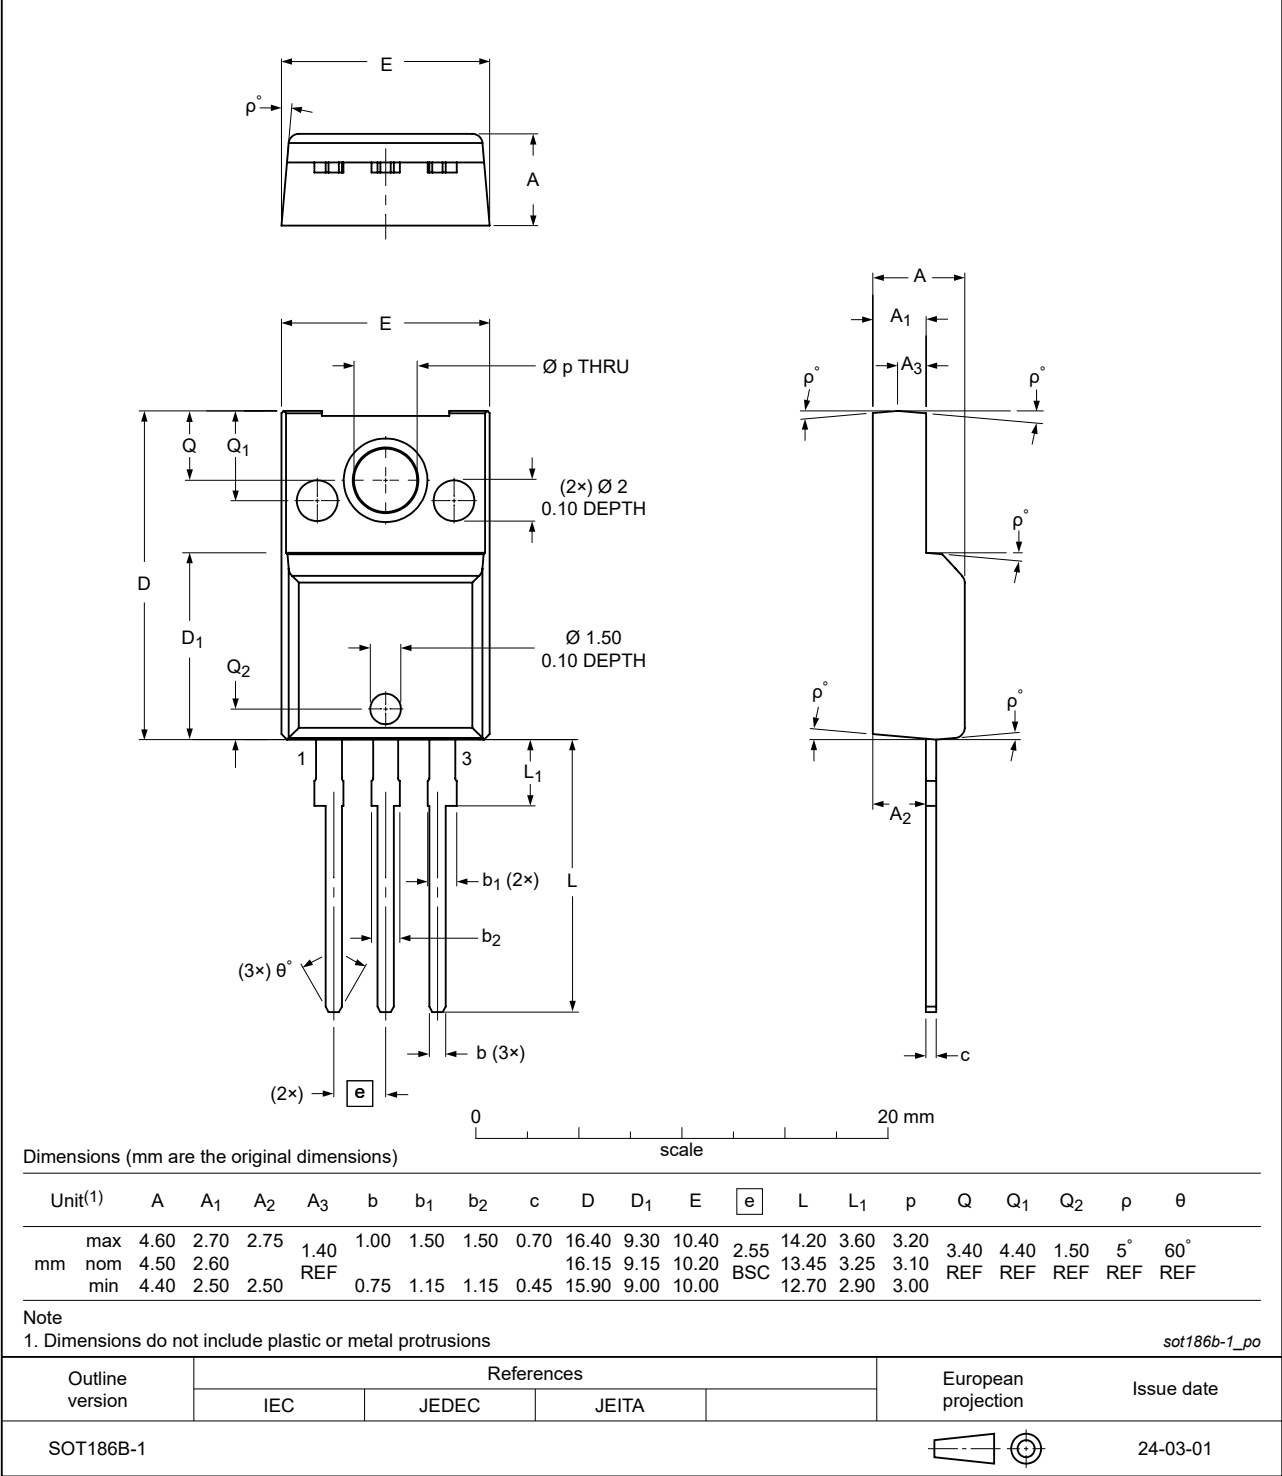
Package outline TO220-3 FP (SOT186B-1)
